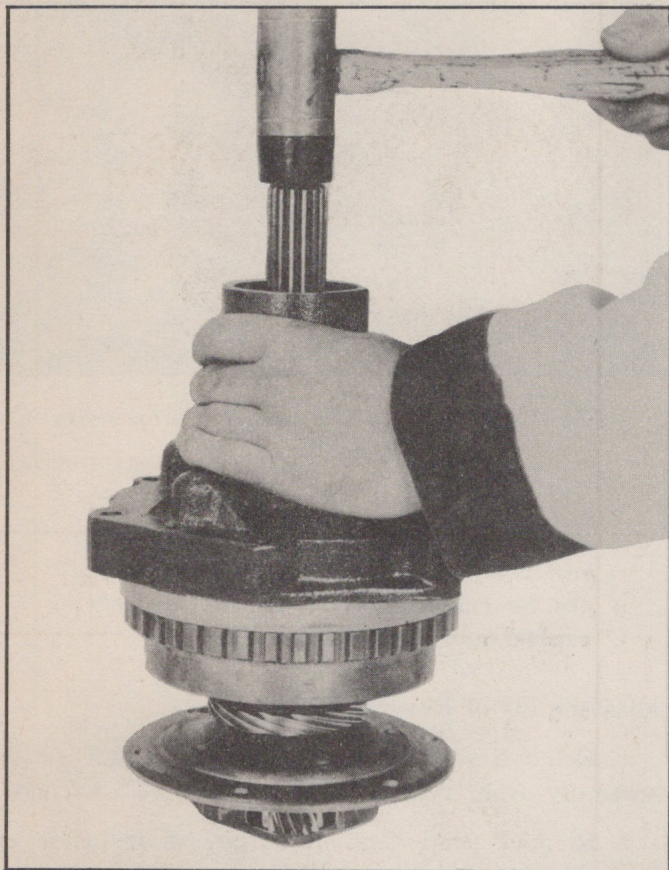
Removing Rear Bearing Retainer from Output Shaft
